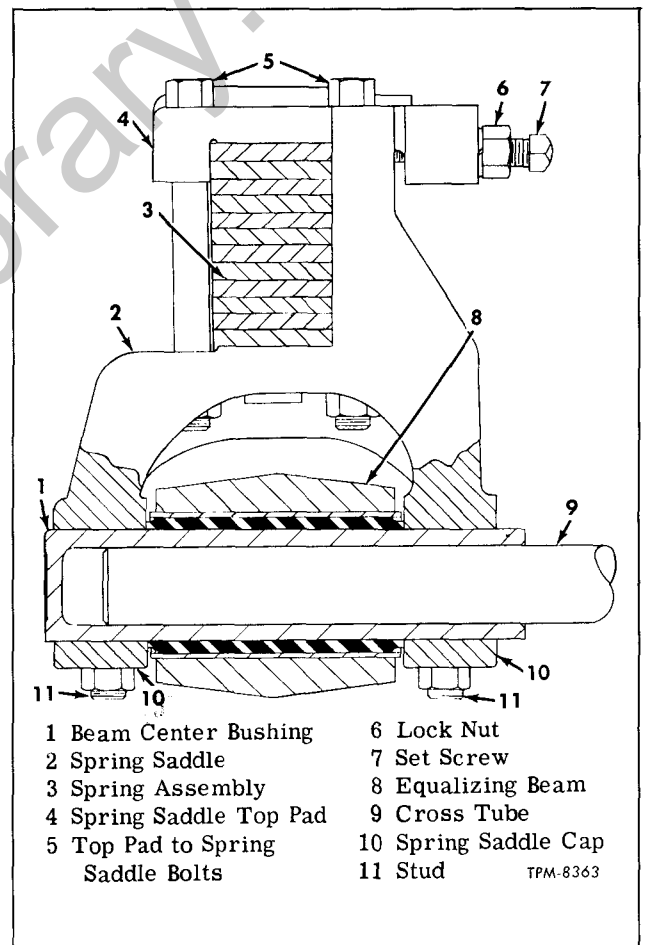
Section Through Spring Saddle and Beam (RT Type Suspension)
